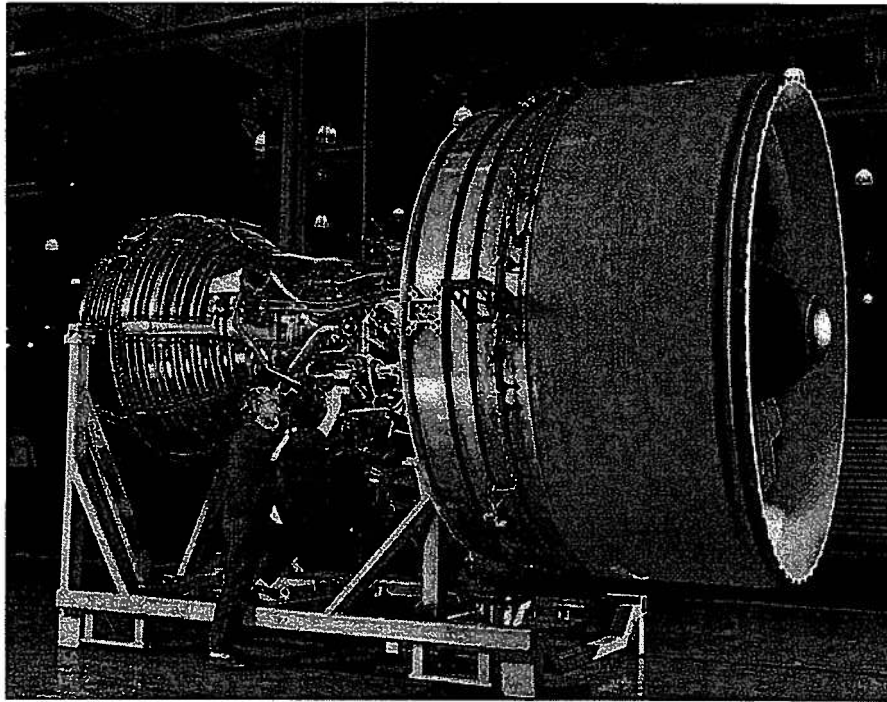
Pratt and Whitney PW4000 (112 inch) Turbofan Engine on the Assembly Stand
